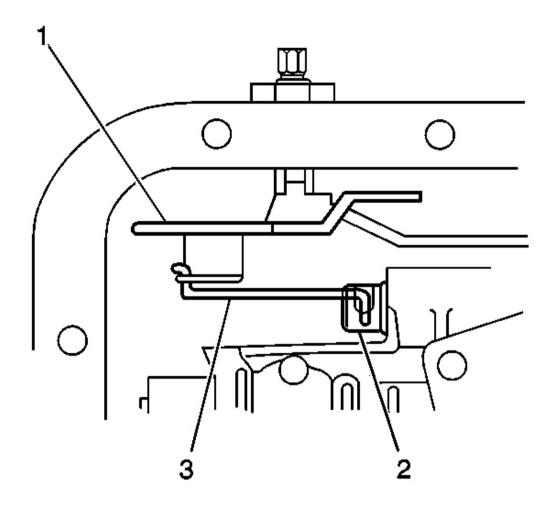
Verifying Manual Valve Link Is Installed Properly To The Inside Detent Lever And The Manual Valve Courtesy of GENERAL MOTORS CORP.
